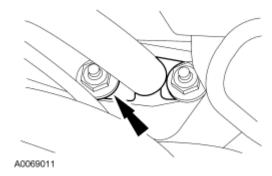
Support Bracket & Nuts Courtesy of FORD MOTOR CO.
